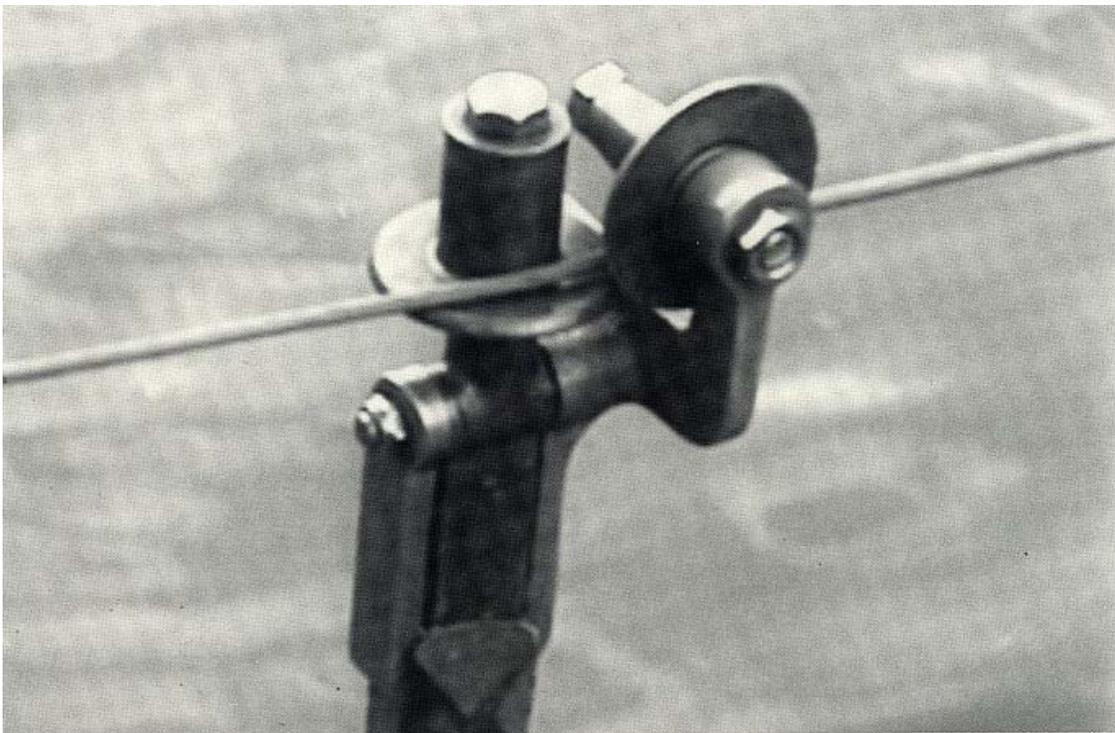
Close-up of the end bracket of crosspiece assembly, in its attached position.
